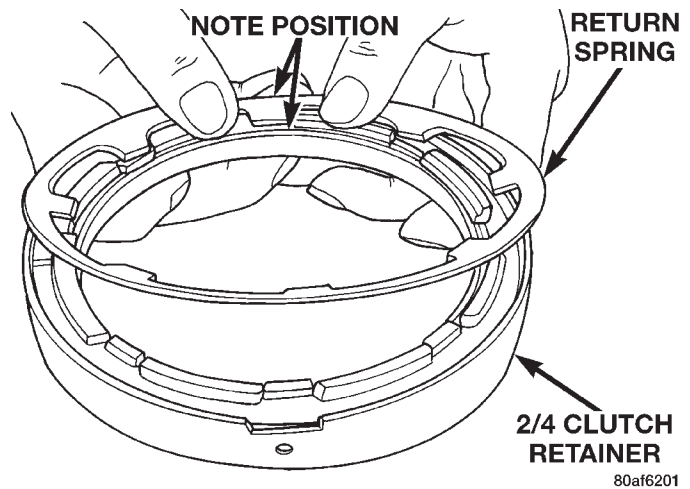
Proper Orientation of 2/4 Clutch Retainer and Spring
